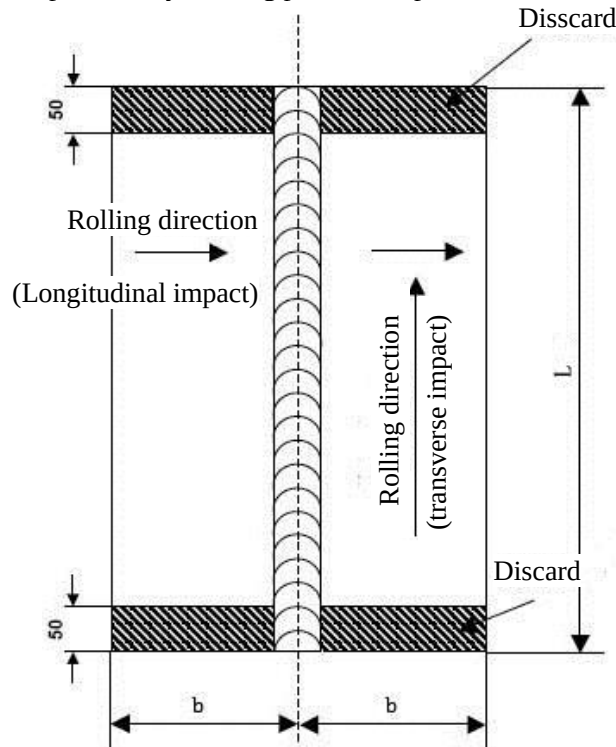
Test Assembly for Butt Weld
